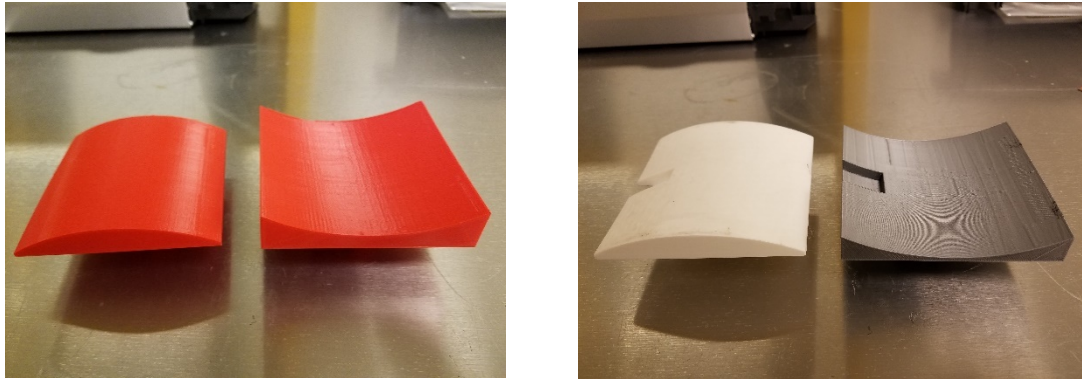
3D printed fixtures of 4x40 in. barrel-like (left) and 4x40 in. saddle-like (right) surfaces
